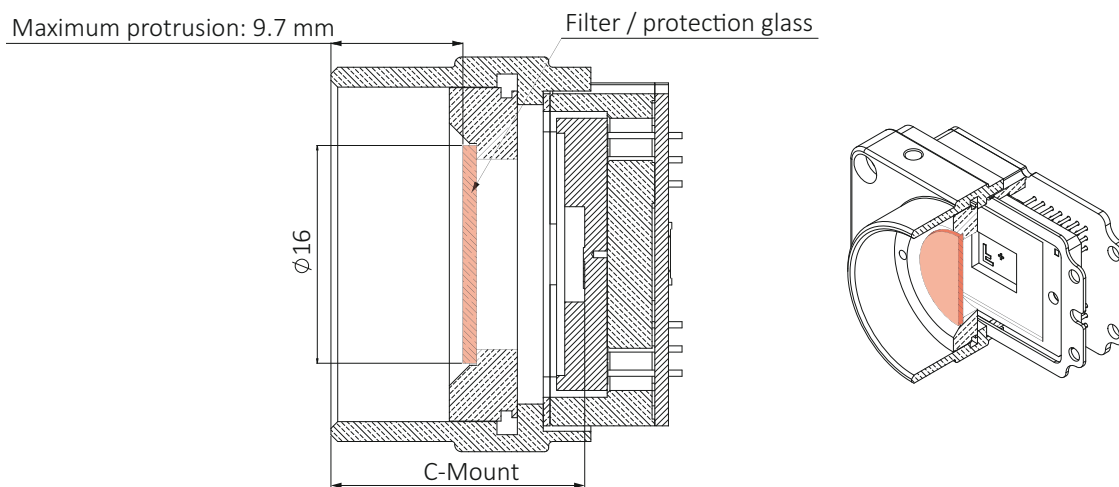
Manta type B C-Mount dimensions (16 mm filter)
